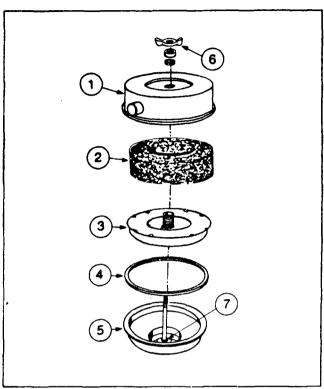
, (V51909). Crankcase breather --- mesh element with vapor barrier
